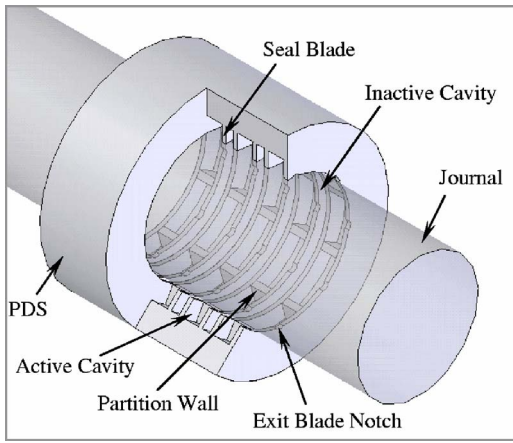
Ten-bladed pocket damper seal (sectioned view)
